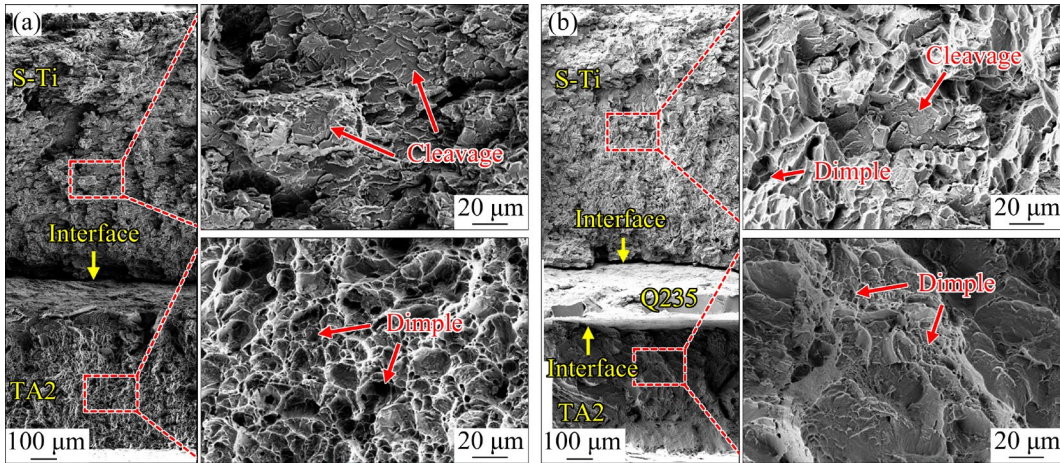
Morphologies of samples after tensile fracture: (a) As-SR; (b) As-SRT
